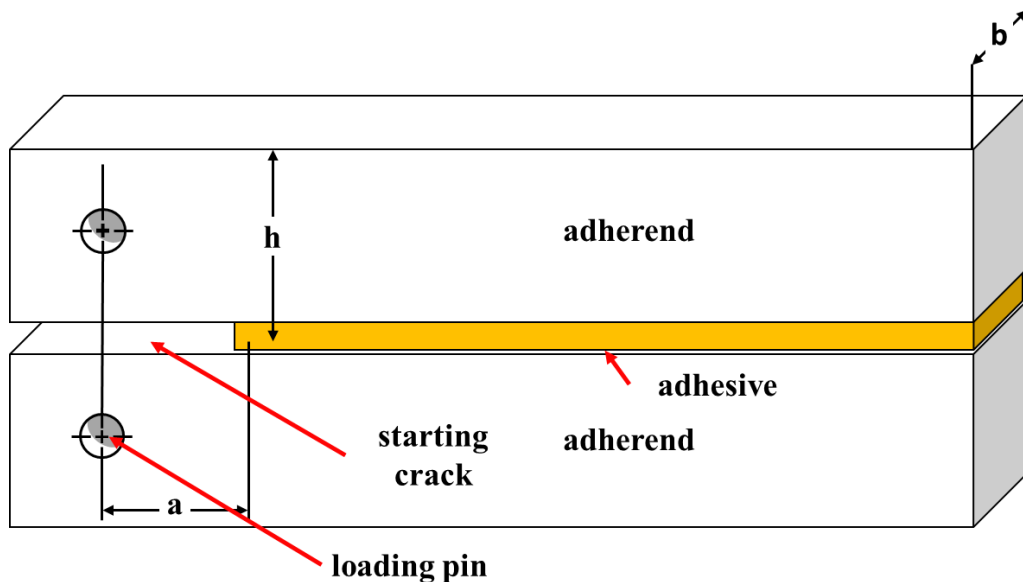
Specimen used to calculate fracture toughness of adhesive joints.
